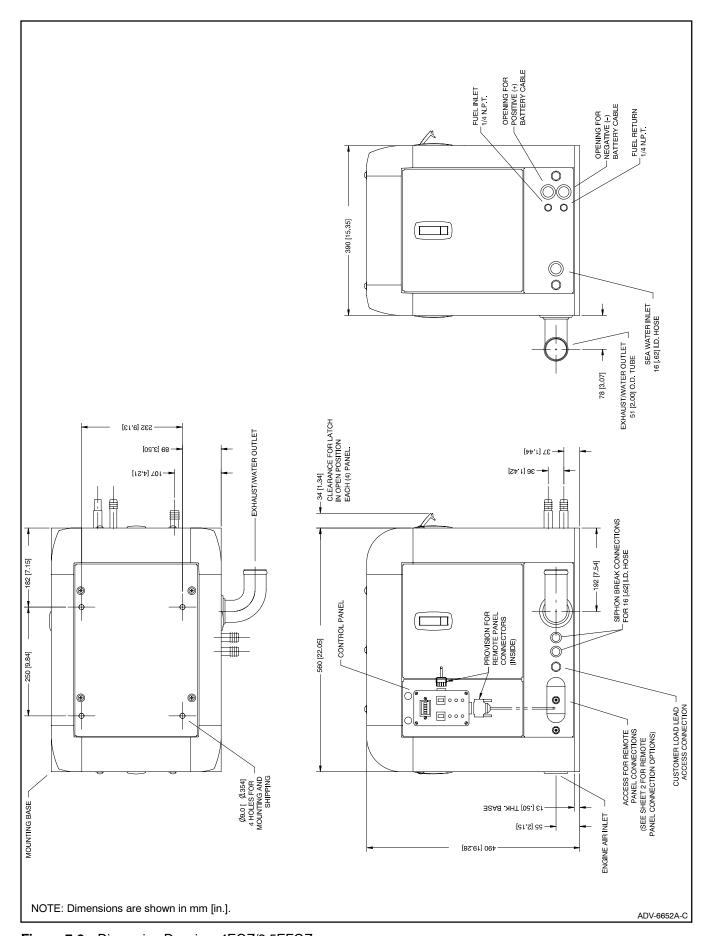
Dimension Drawing, 4EOZ/3.5EFOZ
